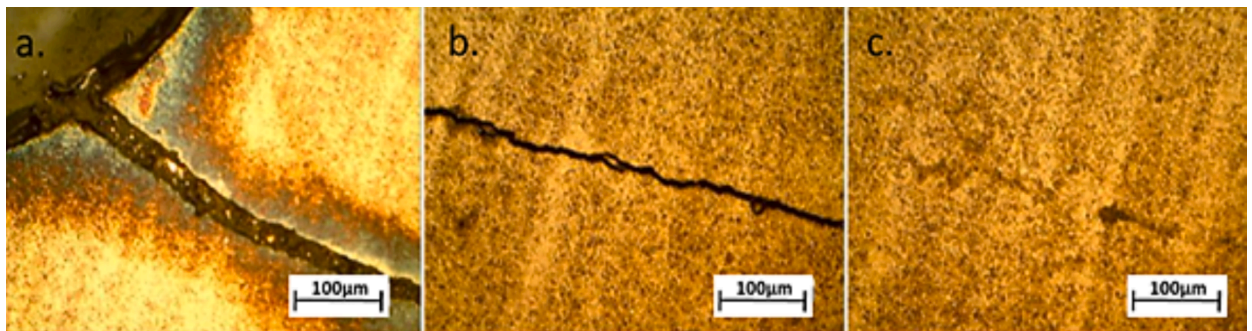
Locations of failure – cracks (a) crack in the transition radius, (b) crack in the core, (c) microcracks in the core.
